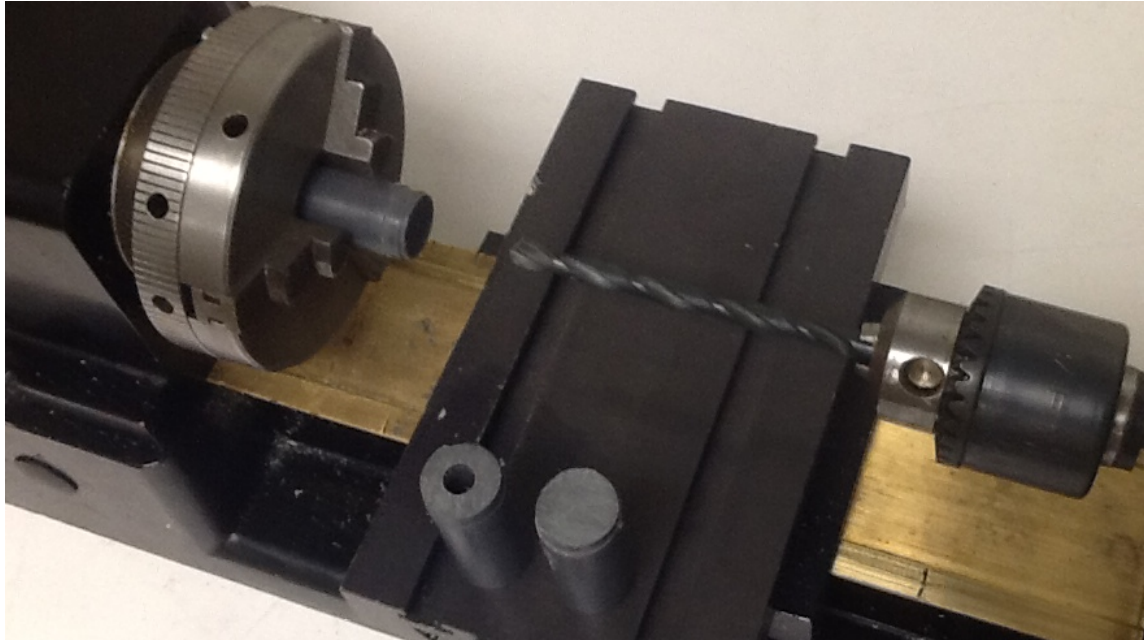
5: Fabrication of socket step 5. A 3/16" hole is center drilled on the turned side from step 3. This enabled water vapor to reach the sensor.
